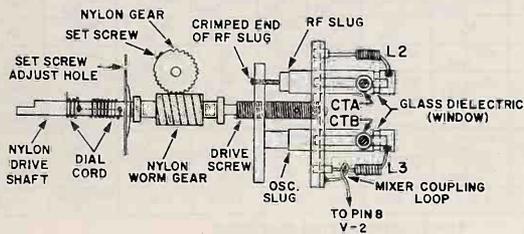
BOTTOM VIEW OF TUNER (IN MAX. CW POSITION WITH SHIELD REMOVED)
